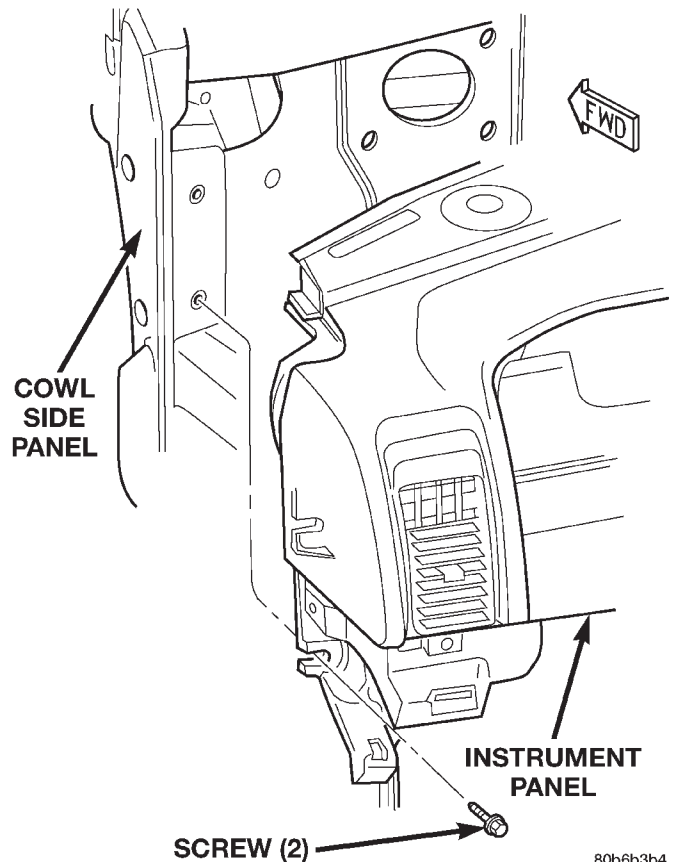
Instrument Panel to Driver Side Cowl Side Inner Panel Mounting
